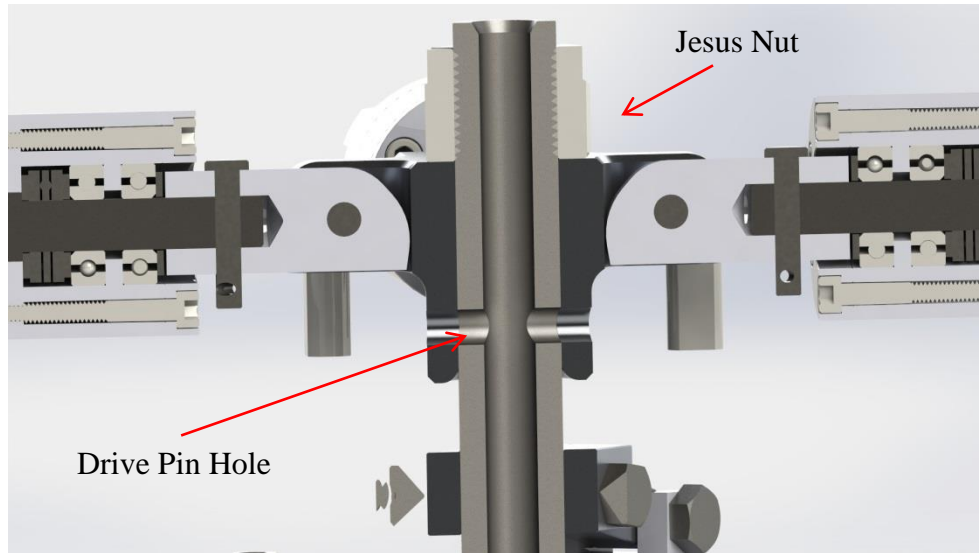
A cut away view of the upper driveshaft showing the locations of the Jesus Nut and drive pin hole.
